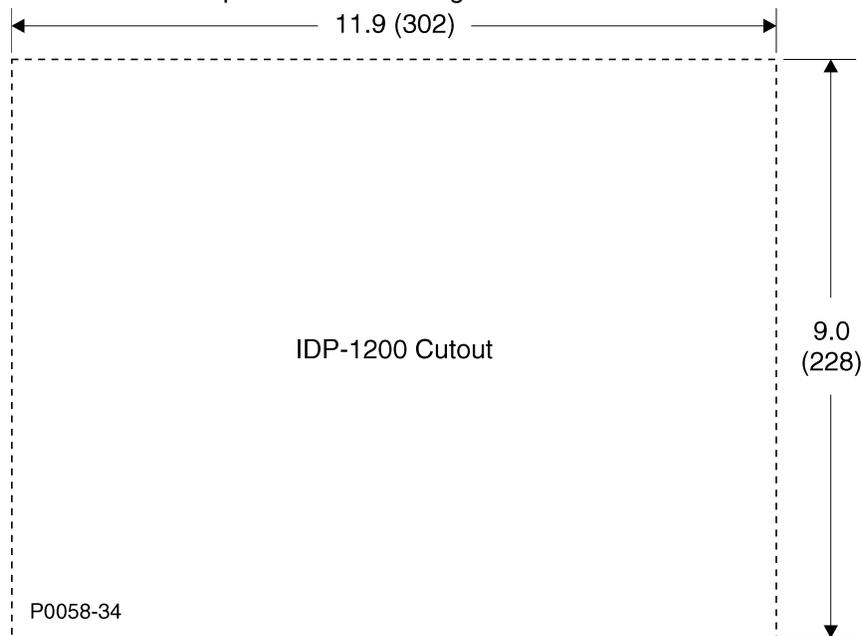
IDP-1200 Panel Cutting Dimensions for New Installations
